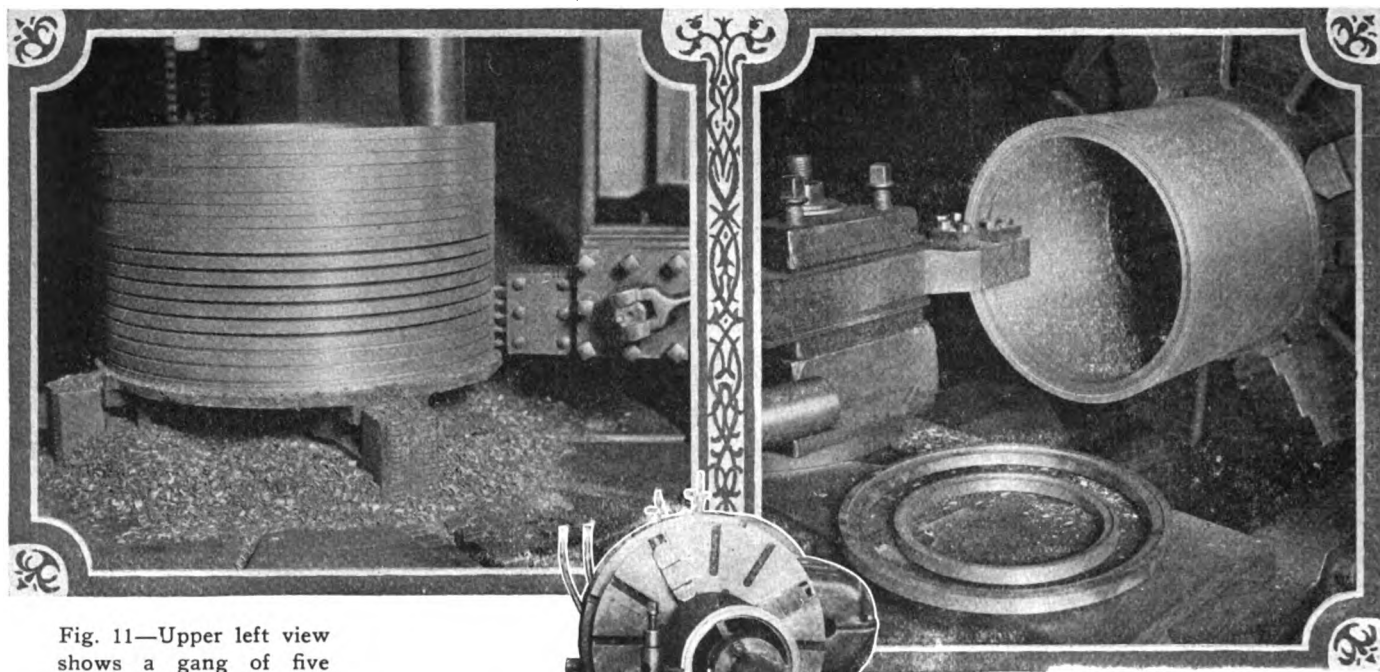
Upper left view shows a gang of five tools cutting the piston packing rings from a tub.
